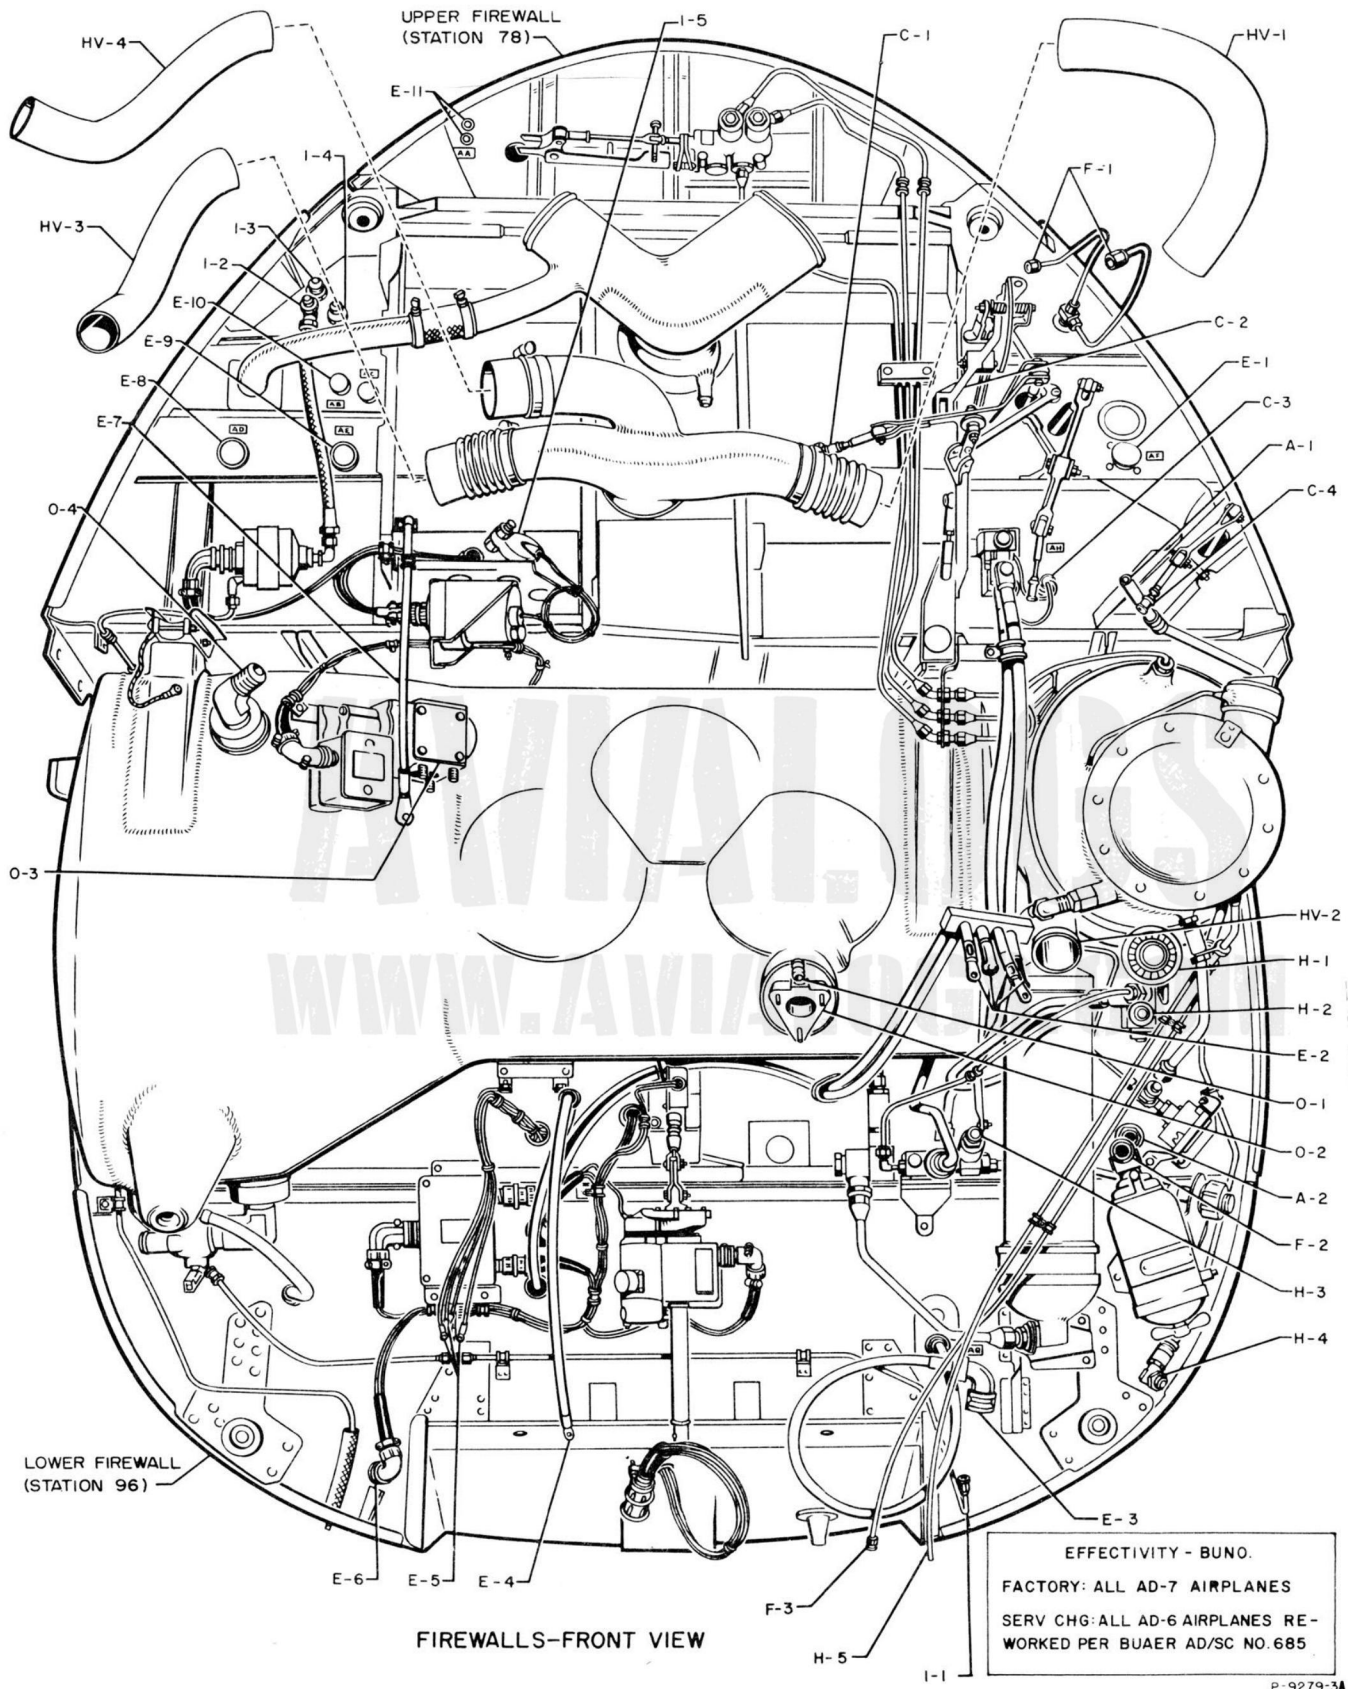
Demountable Power Plant—Removal and Installation (Sheet 6)
